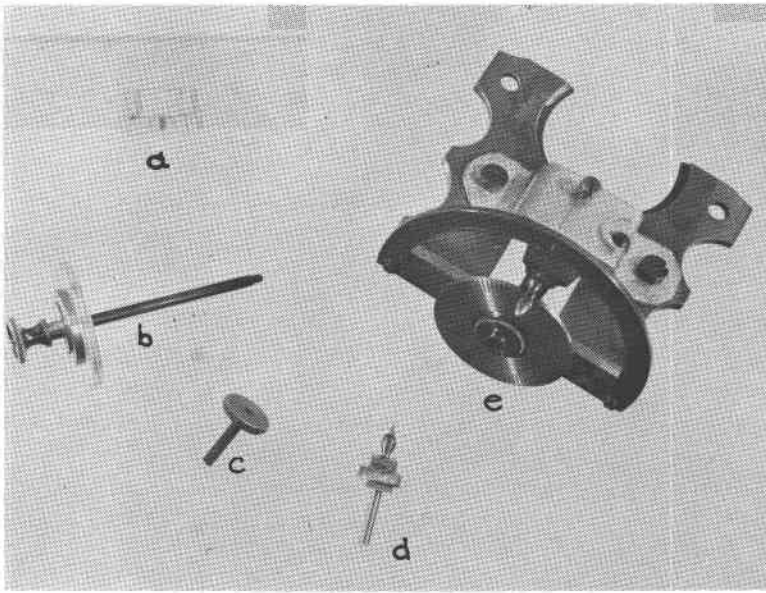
Photograph of the different parts of the spindle stage: (a) oil-cell, (b) main spindle with the drum-pointer, (c) fixing screw, (d) head (showing perpendicular slides and the ball-joint), (e) drum, protractor, vernier etc.
